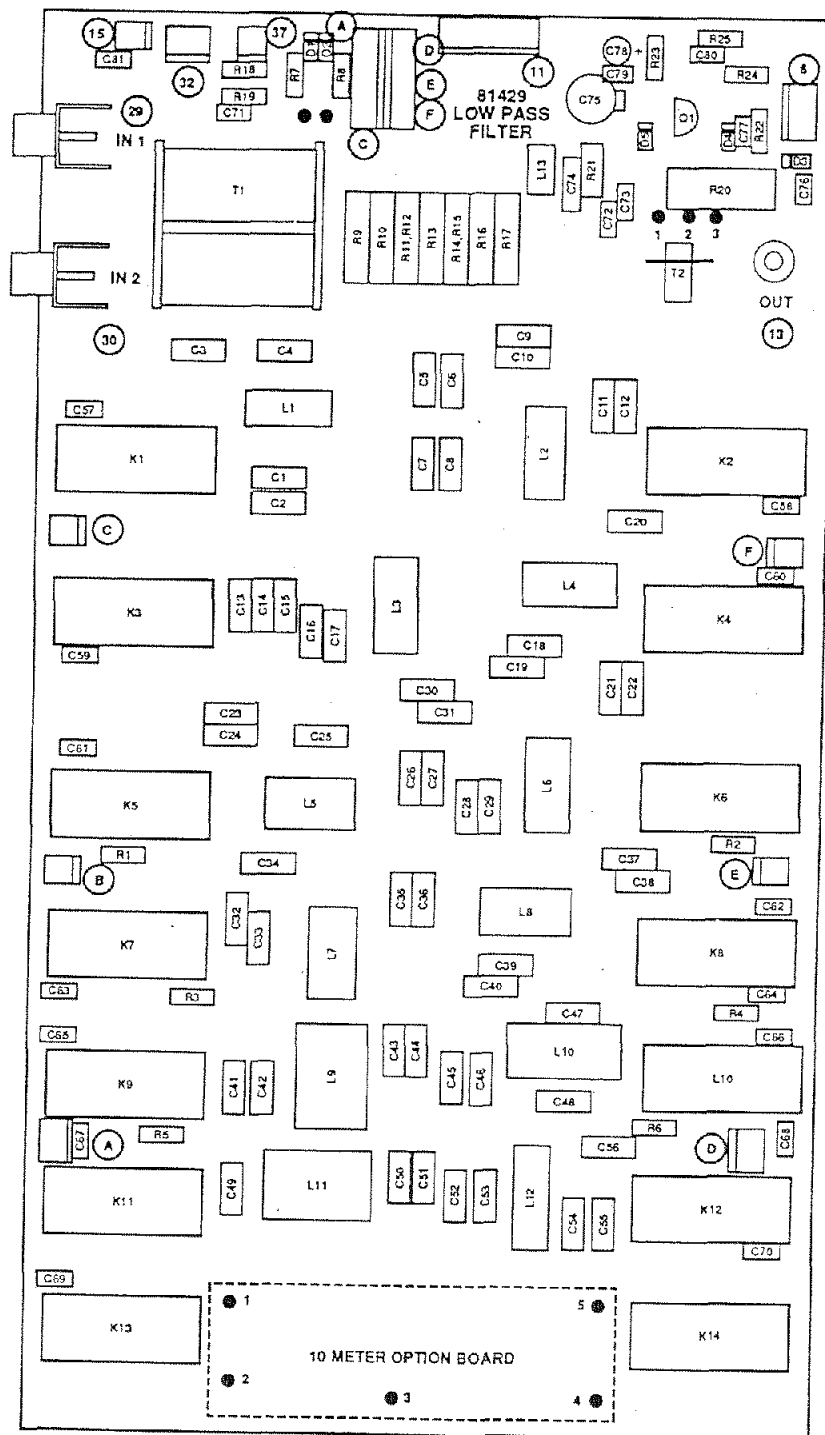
81429 LOW PASS FILTER BOARD COMPONENT LAYOUT
